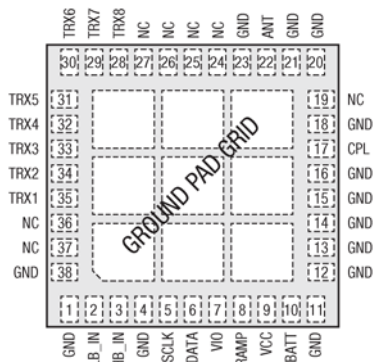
PCB LAYOUT FOR 5.5 mm x 5.3 mm, 38-PAD LEADLESS PACKAGE – SKY77910-11 SPECIFIC
